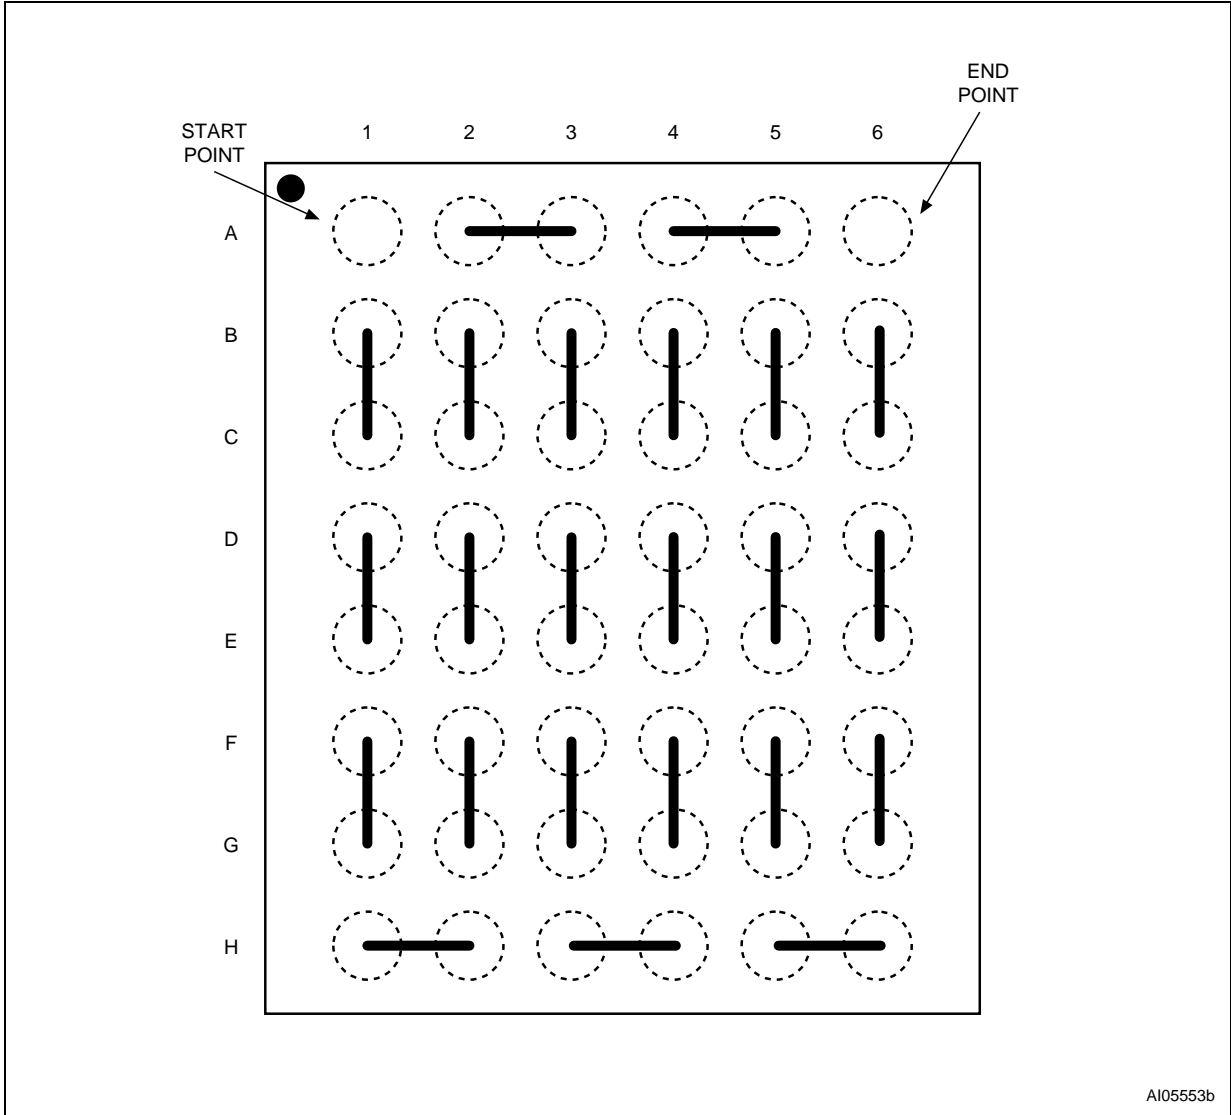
TFBGA48 Daisy Chain - PCB Connections (Top view through package)
